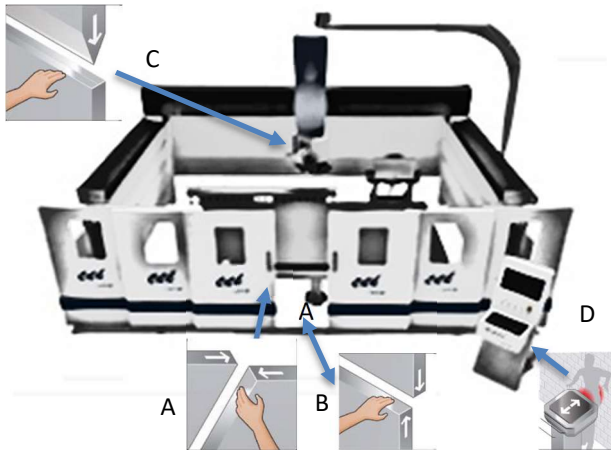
Codification at CAD 3D StoneCUT® mill machine.
